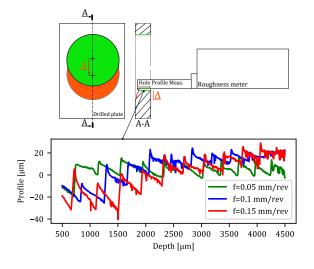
Hole profile measurement on Aluminium 6082 (HoLex tool) - $v_c = 150$ m/min
